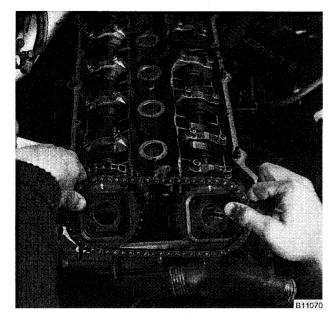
Secondary chain sprockets and chain being installed. Attach sprockets with arrows pointing up and elongated holes centered.
